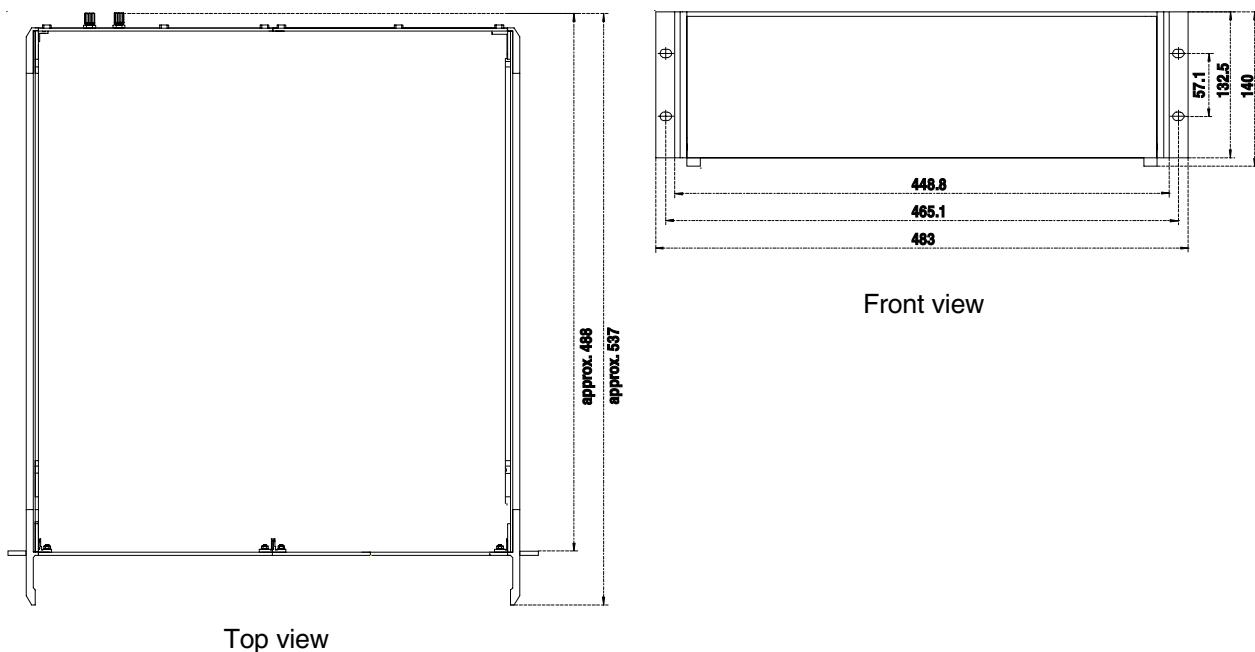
Dimensional sketch MLT 3/4 [all dimensions in mm]
